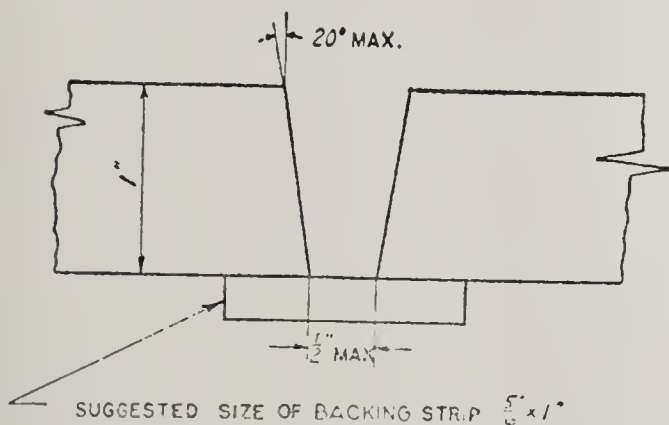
(a)—Butt Joint for Plate 1 in. Thick.
